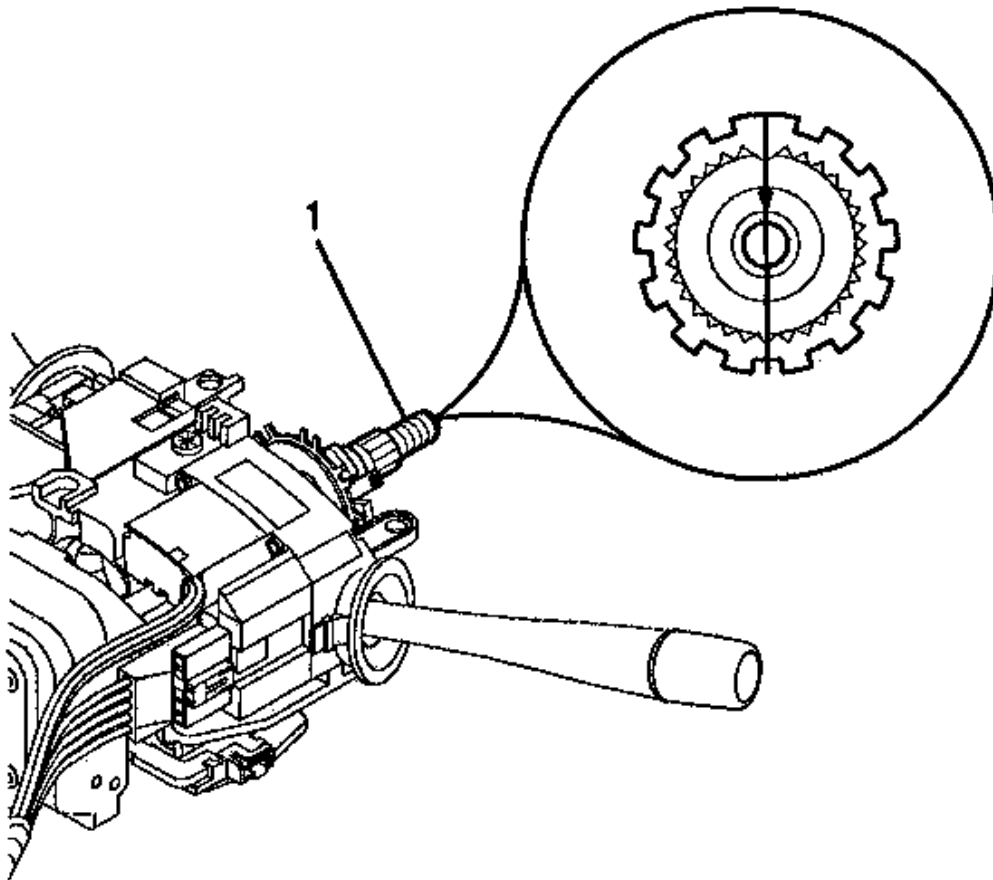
View Of Block Tooth Of Steering Shaft Assembly In 12 O'clock Position
